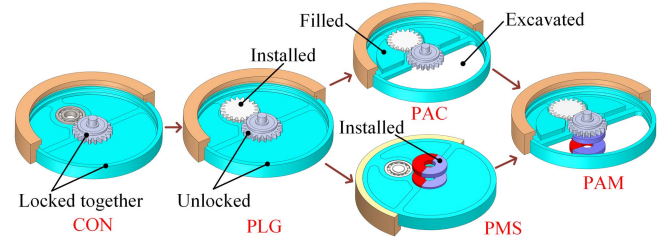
Components modification for different configurations. The planetary gear system is installed on the backside of PMS.
